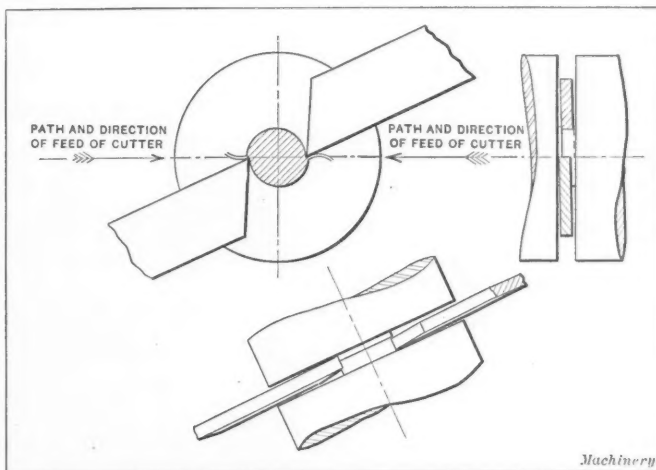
Method of mounting Cutters that gives Ample Clearance
